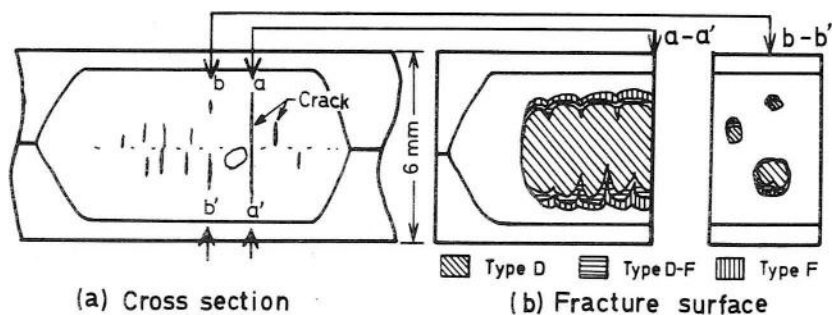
Schematic illustration of cross section of resistance spot weld metal showing location of cracks and features of solidification crack surface morphology.
